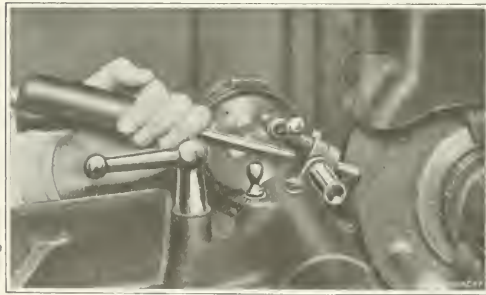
Truing Face of Grinding Wheel by Means of Ordinary Diamond Holder
